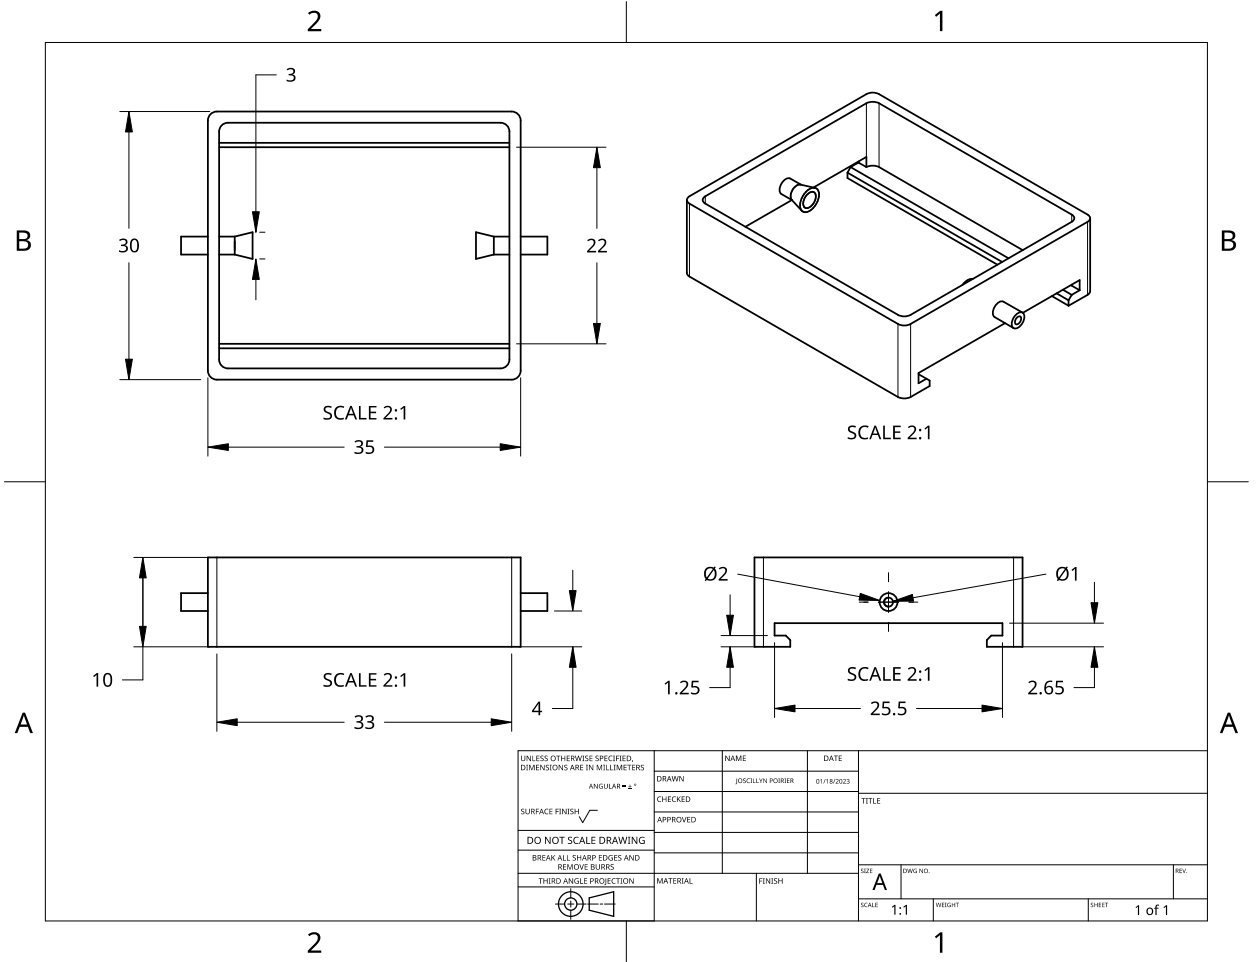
Engineering drawing of the printing chamber showing the dimensions and size of the final design.
